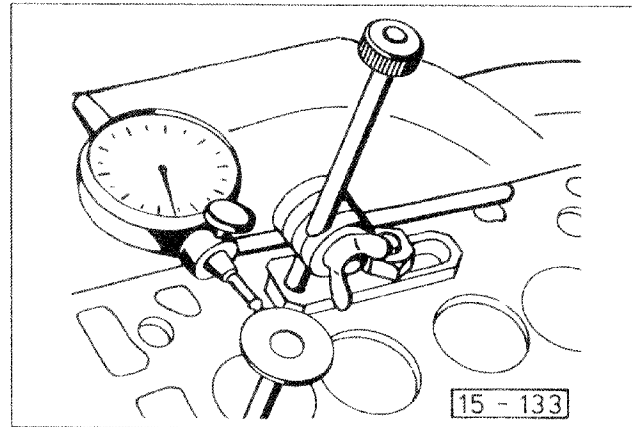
Valve guide wear being checked with a new valve. Insert valve until stem end is flush with end of guide. Maximum play for all intake valves is 1.0 mm (.039 in.). Maximum play for exhaust valves is 1.3 mm (.051 in.).
